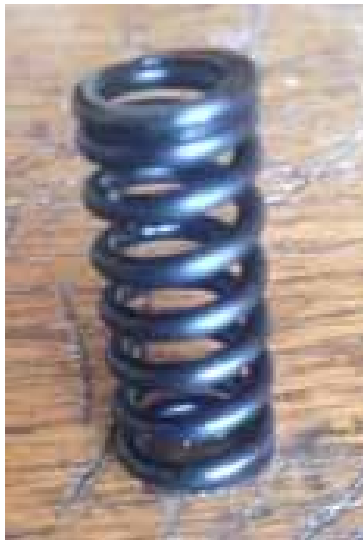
Spring above the piston valve with sloping (not parallel) surfaces
